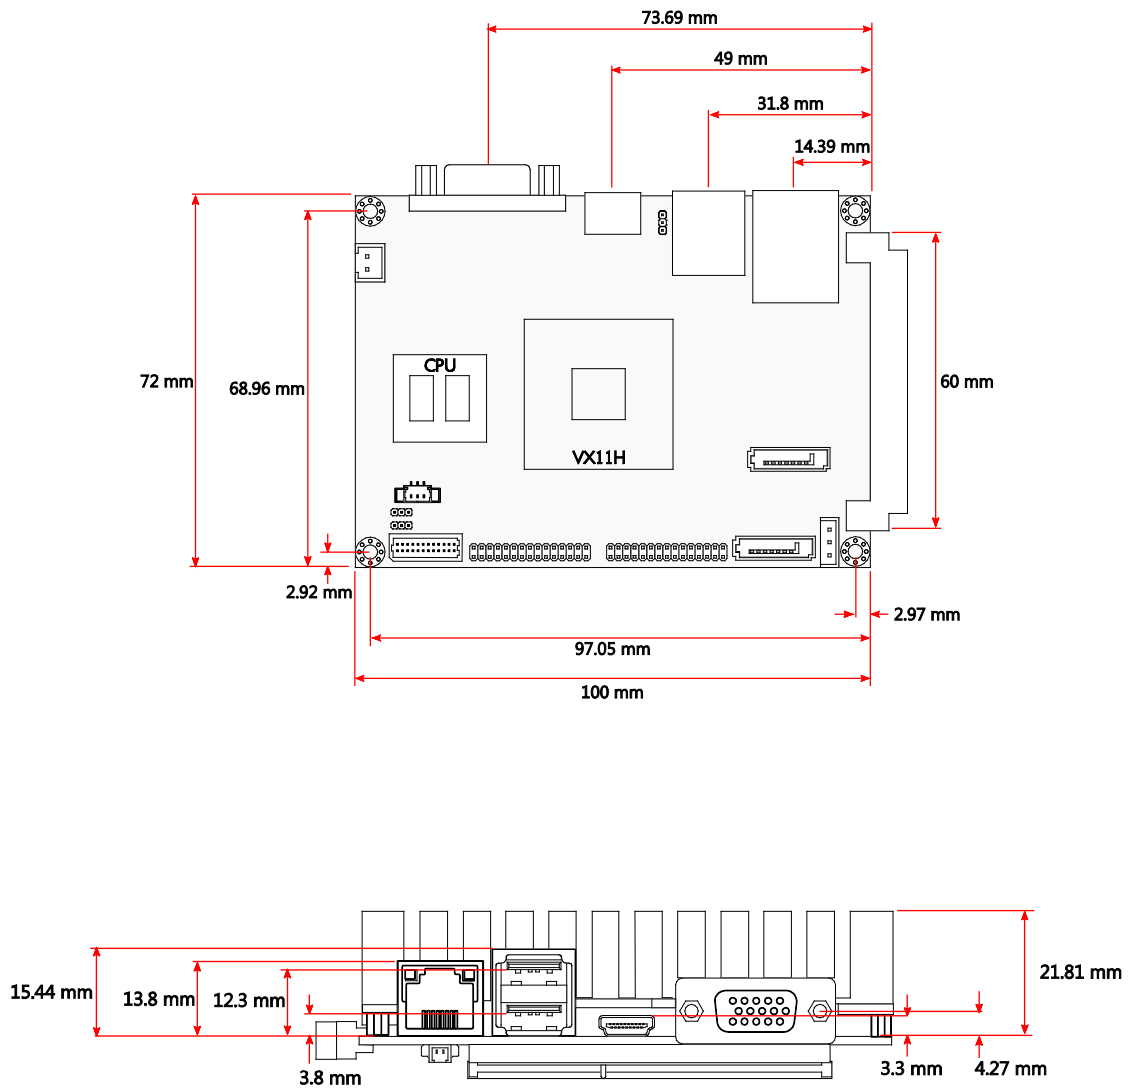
Mounting holes and dimensions of the VIA EPIA-P910
